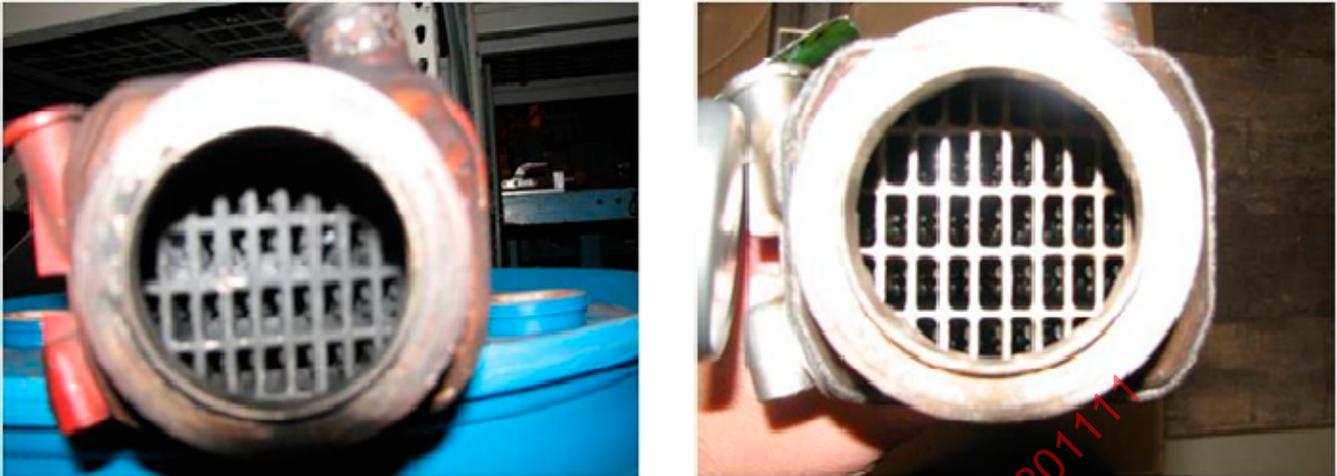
VISUAL ILLUSTRATION OF FOULED EGR COOLER INLET AND TUBES
